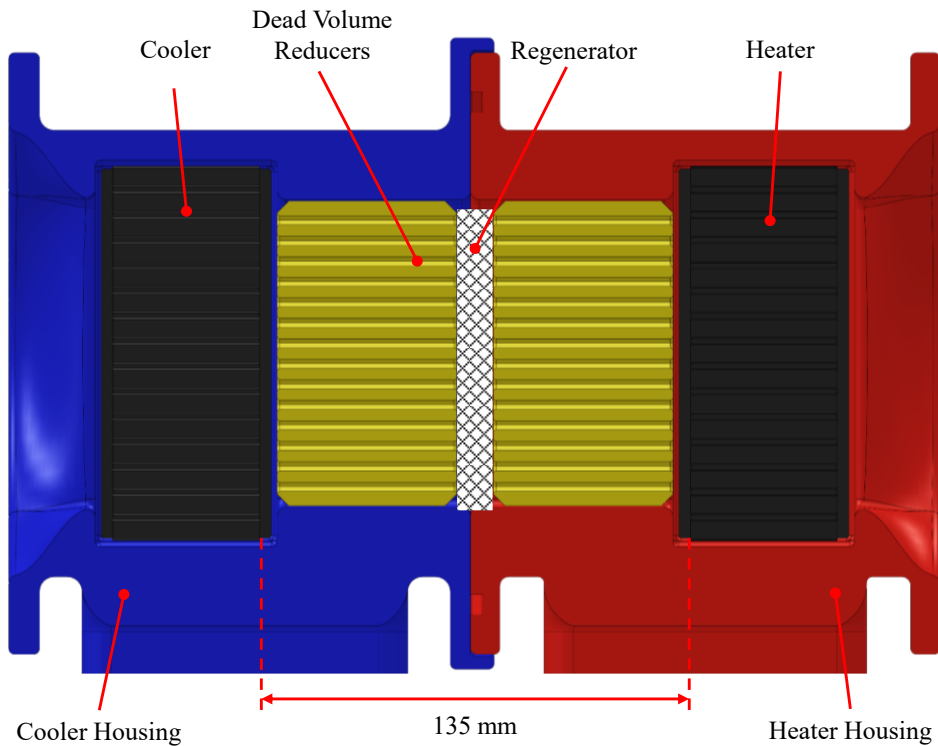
OPA MK II Heat Exchanger Assembly Section View
